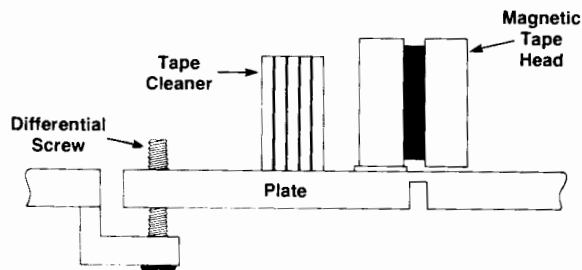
Magnetic recording head plate assembly. Skew is adjusted by turning the very-fine-pitch differential screw.
